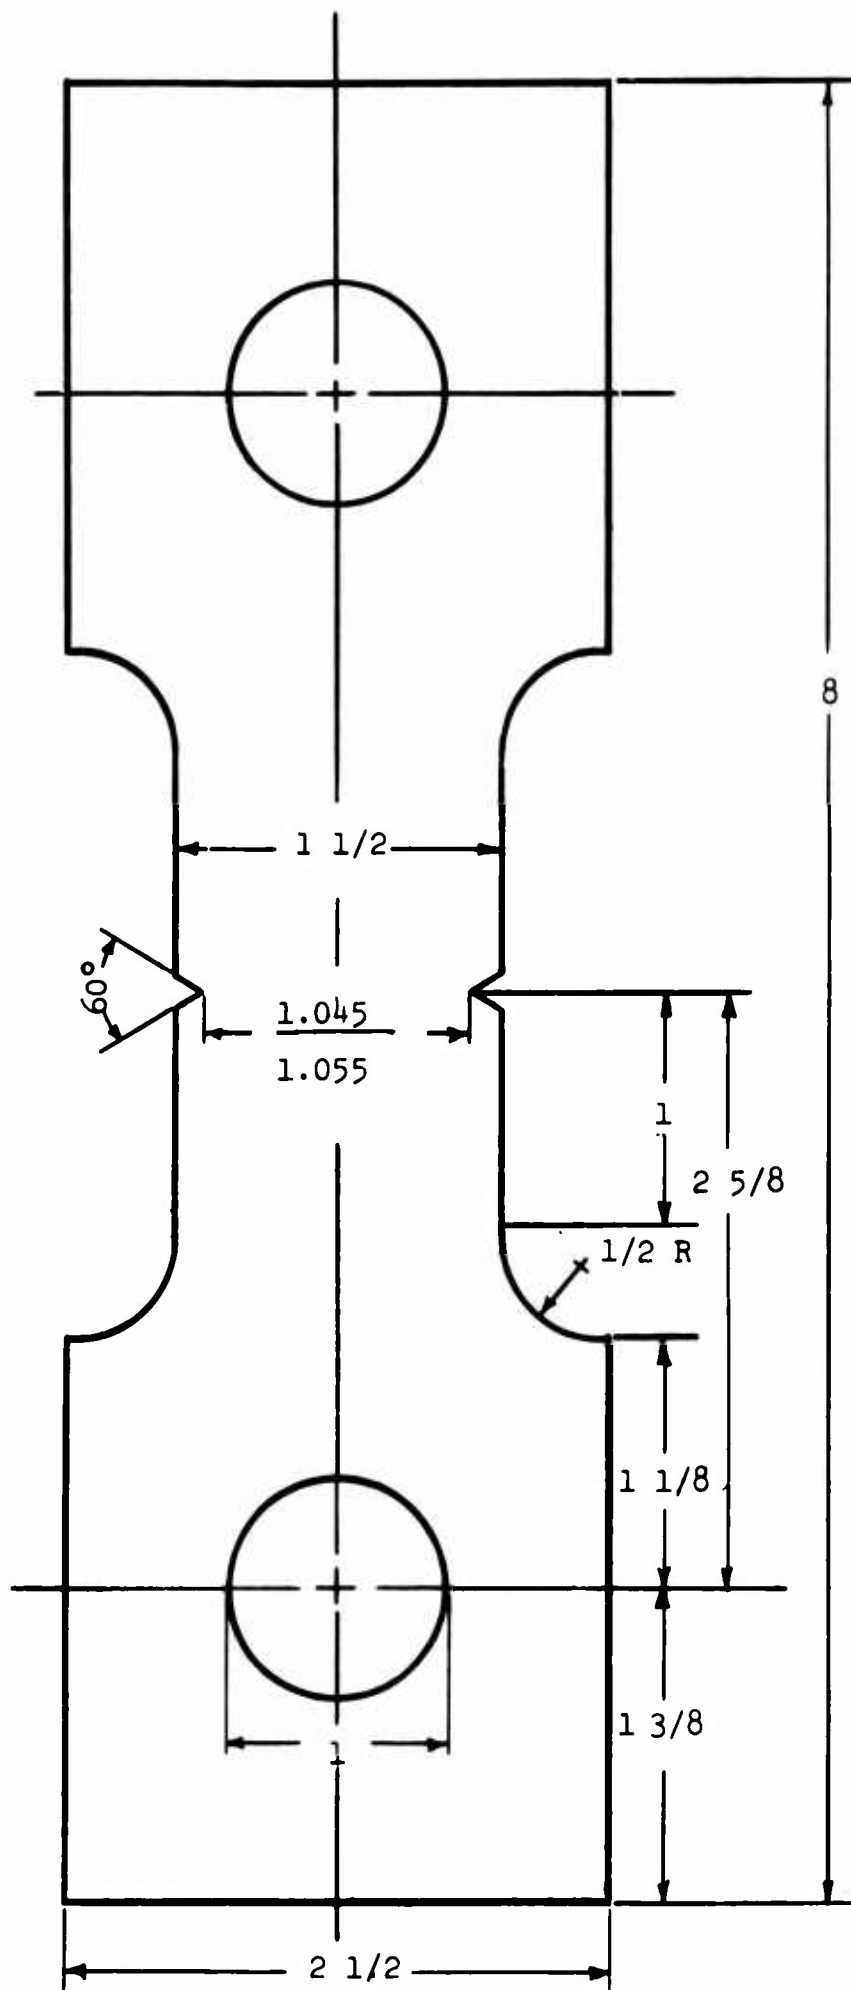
NOTCH SHEET FATIGUE TEST SPECIMEN
